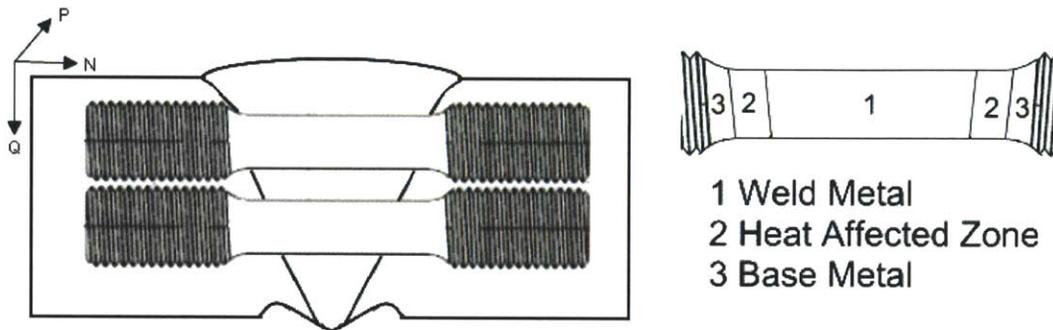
Tensile specimen weld location and constituency.
